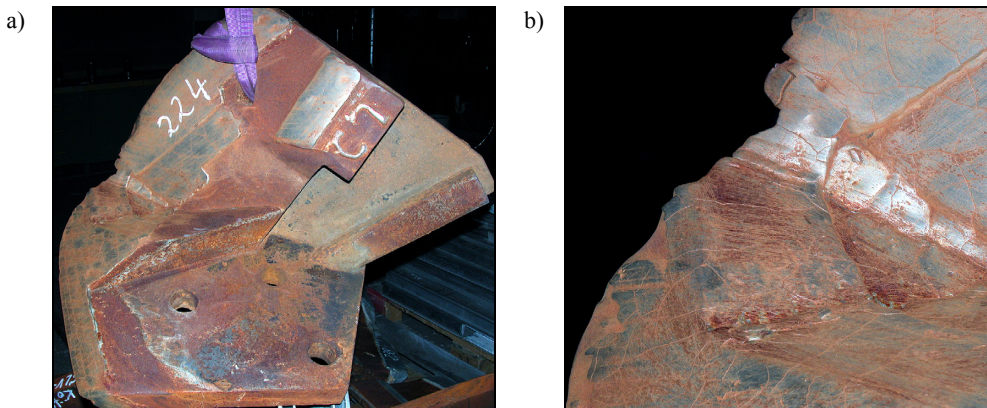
Worn cutting edge 224 (left 2)/cored filler wire coating
